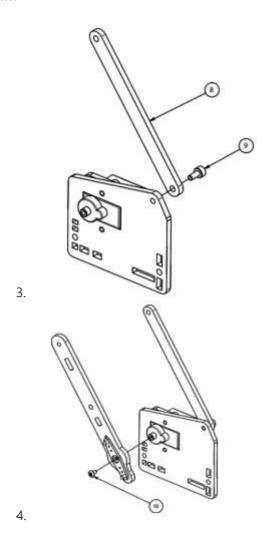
, 3.1.4.2, 3.1.4.3.,3.1.4.4.: Steps to assemble the elbow of the arm respectively.
